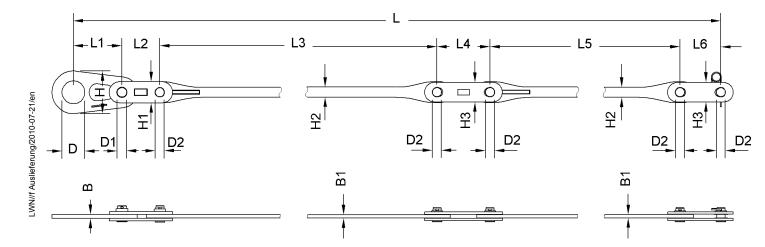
Dimensions of jib pendant strap on 2316 jib head section
